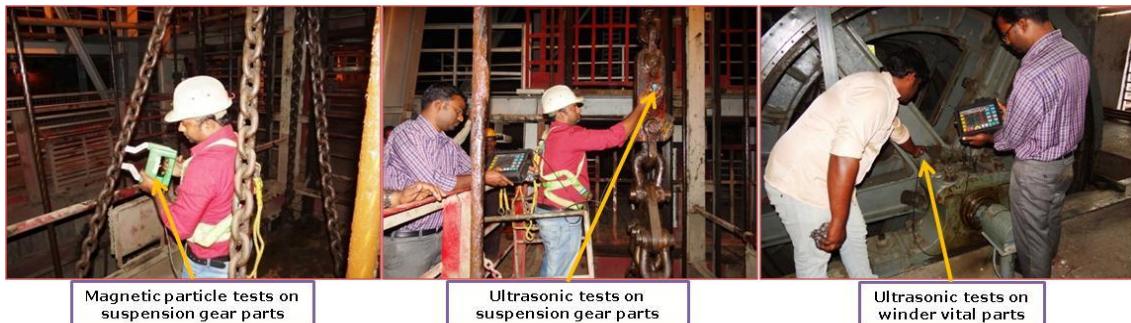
NDT on winder vital components & suspension gear parts, M/s SCCL
